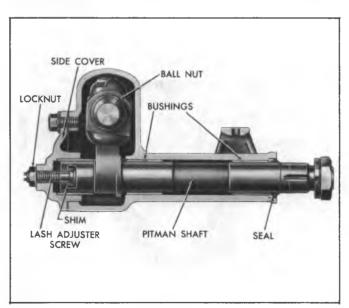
Steering Gear (Corvette and G10-30 Series Trucks)
